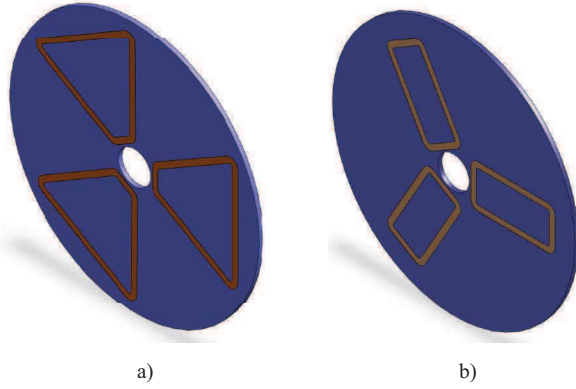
Views of the stators of the prototypes, a) trapezoidal coils and b) rectangular coils.
